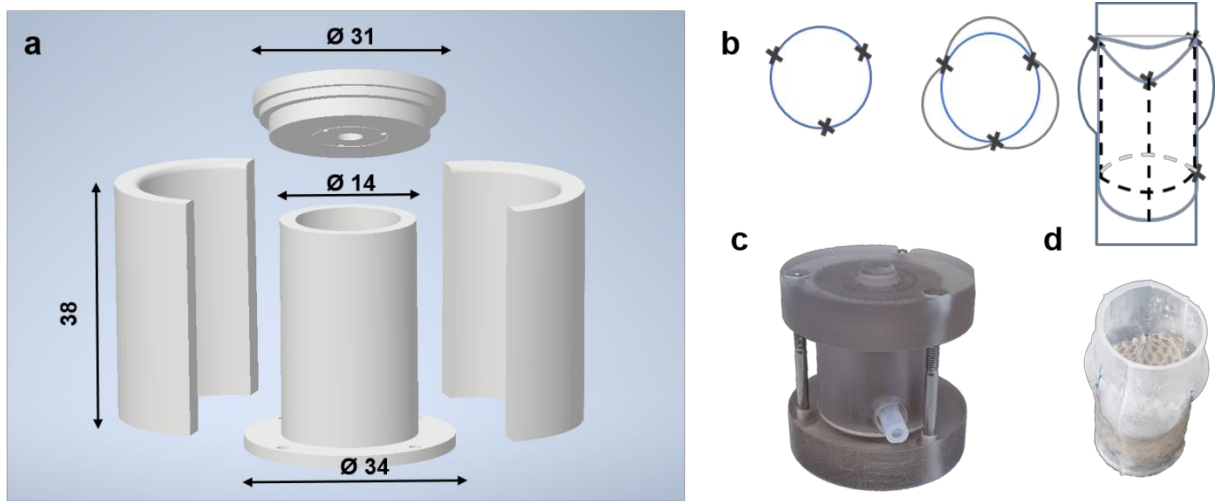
The mold and suturing of the heart valve: a) CAD images of different parts of the mold b) Suture points of the heart valve with the silicon housing c) The mold after 3D printed and fastened d) The heart valve inside a silicon housing after suture
